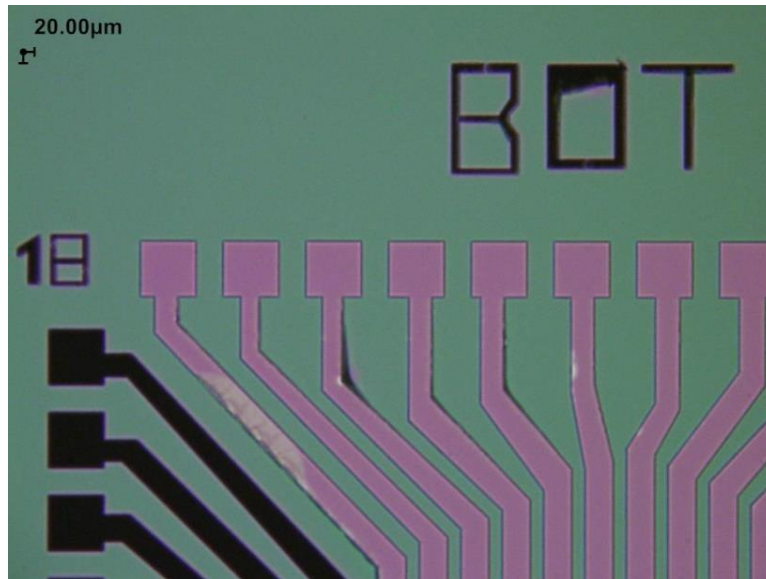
Overmilling visible and the metal for the bottom trace milled away due to beam angle and distance changing as a result of the wafer breaking mid-process.
